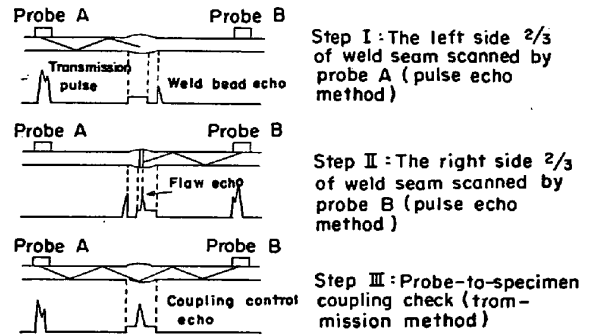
Method of weld inspection using by electronic switching device.
